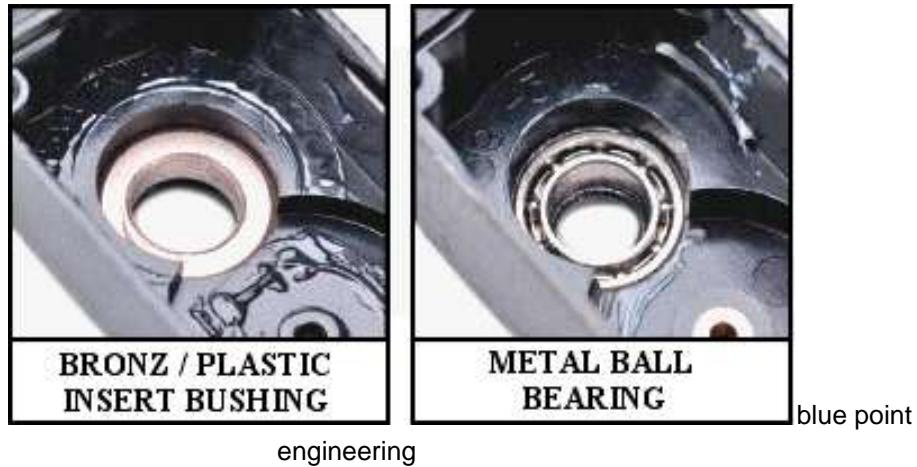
SHOWING THE DIFFERENCE BETWEEN A BUSHING AND A BEARING.
